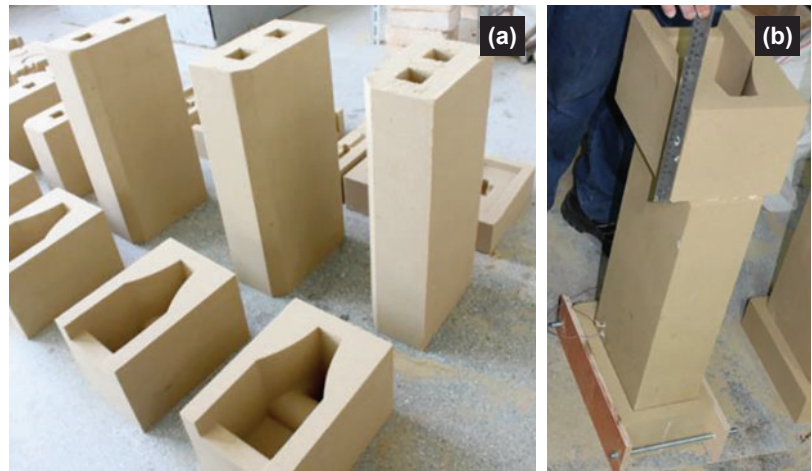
The resin bonded sand mold apparatus, showing: (a) mold parts and (b) the assembled mold.
